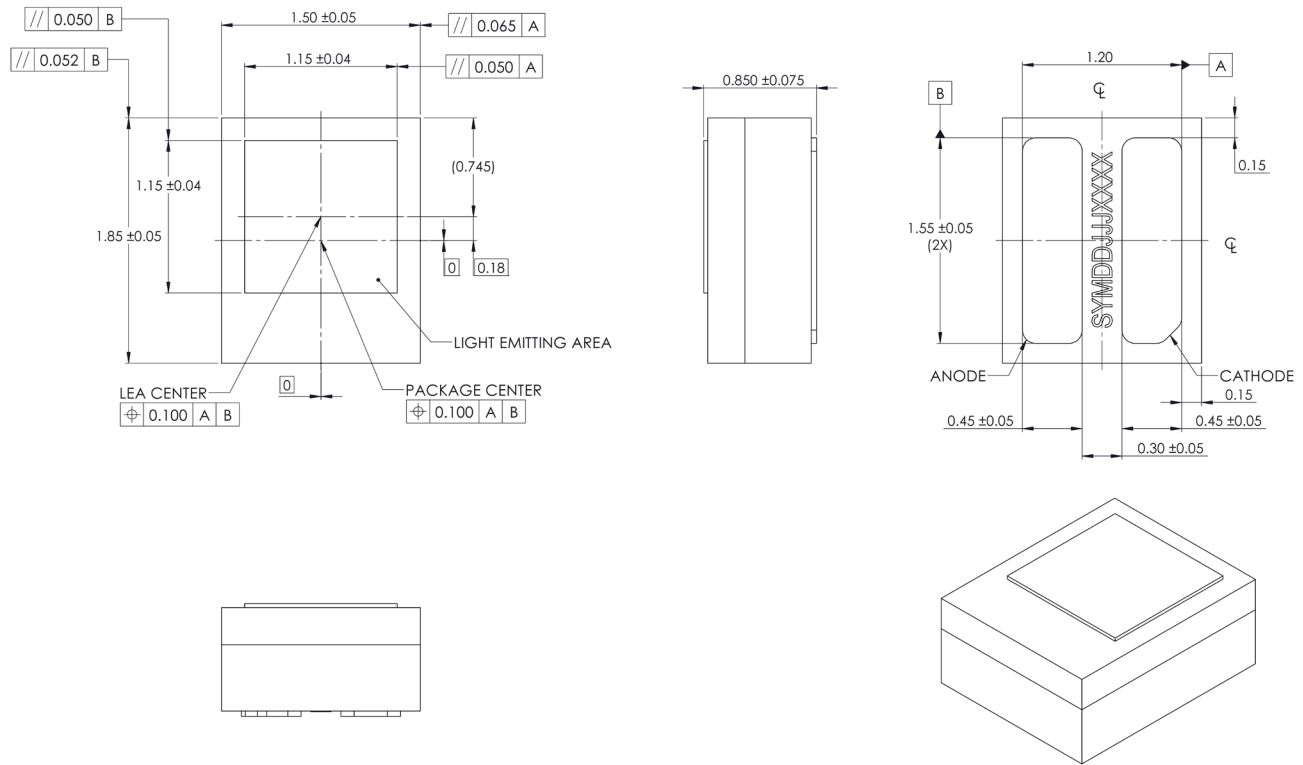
Mechanical dimensions for LUXEON FX2-L PC Amber
